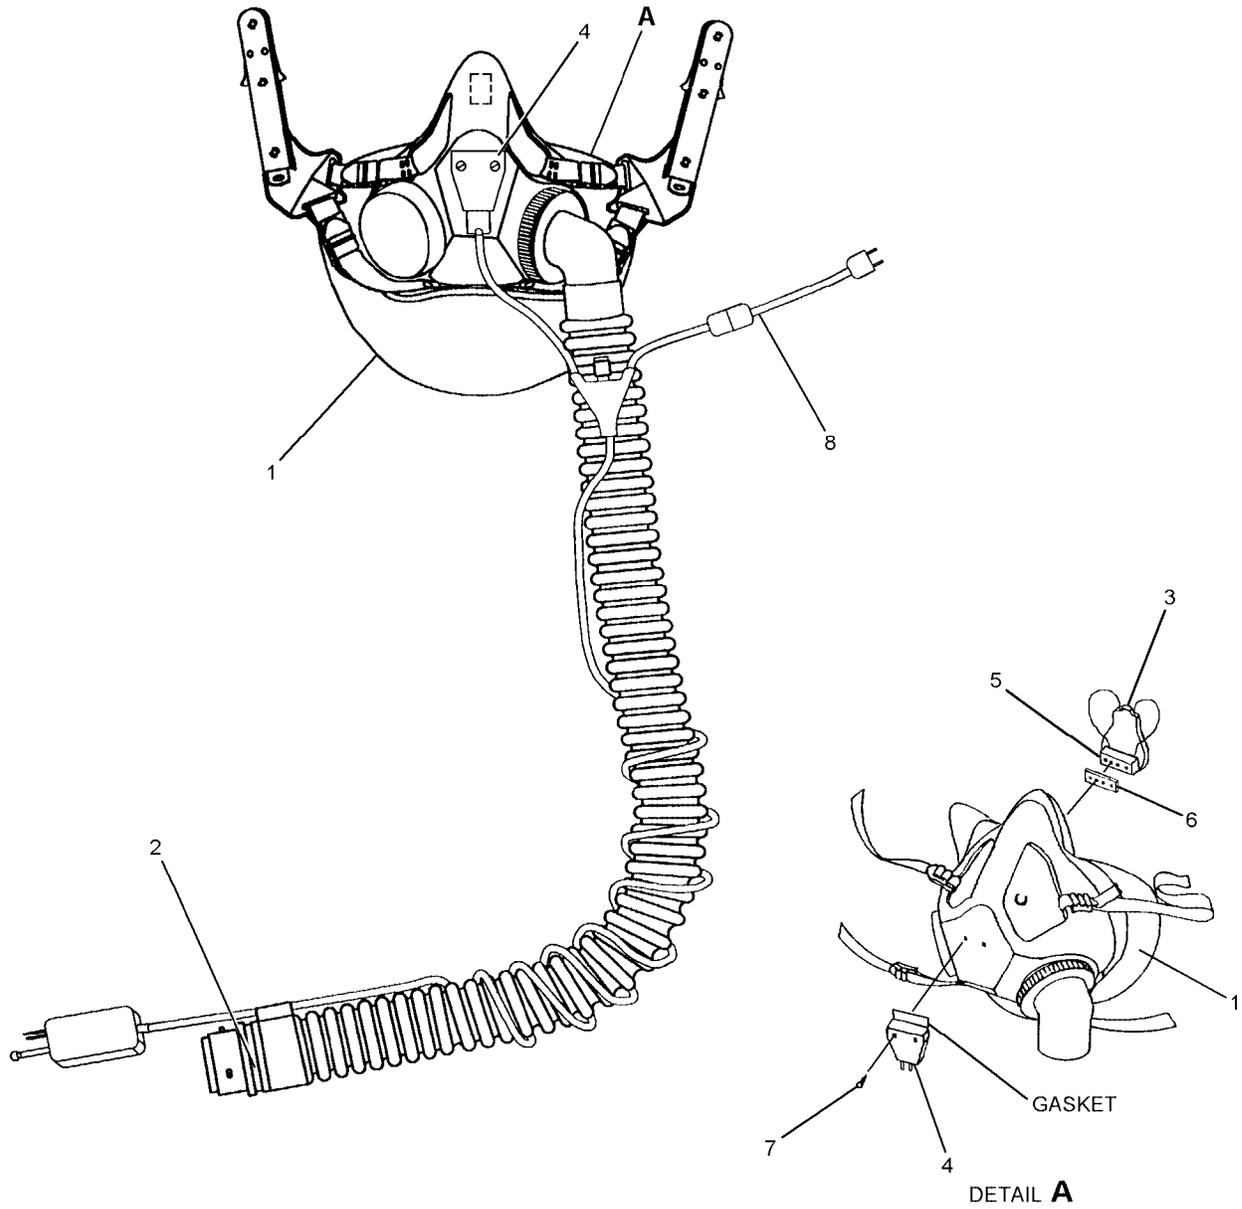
MBU-23(V)4/P Oxygen Mask Assembly Components
